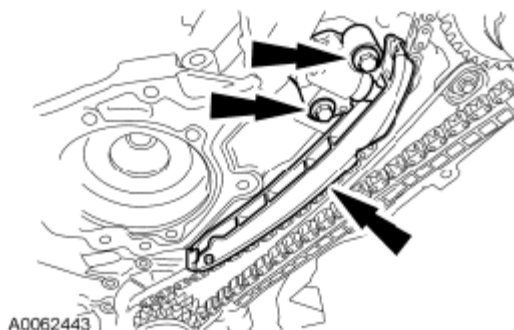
Locating LH Timing Chain Tensioner, Tensioner Arm And Bolts
